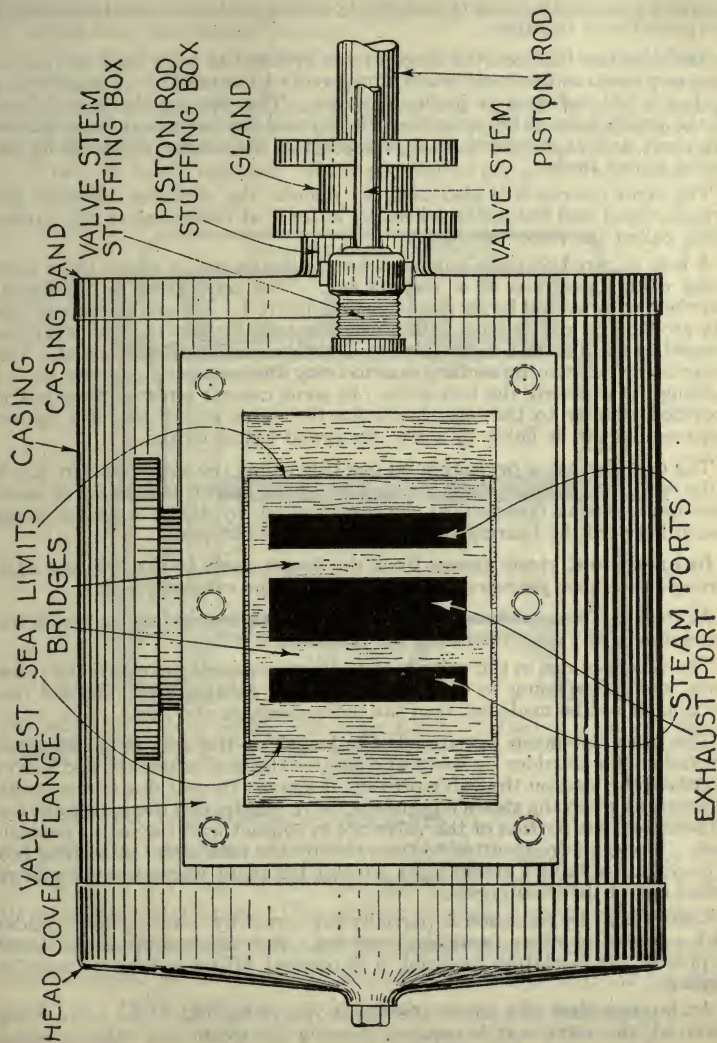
View of steam chest of the cylinder illustrated in fig. 101, with cover and valve removed, showing the valve seat, ports, etc.
